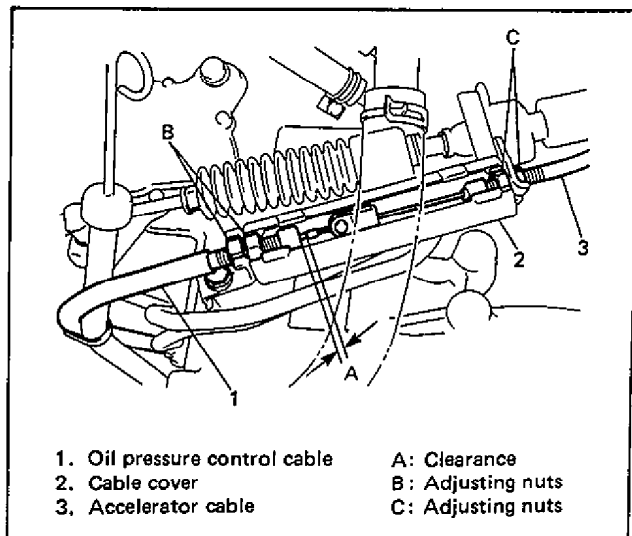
B-80 Adjusting Oil Pressure Control Cable
